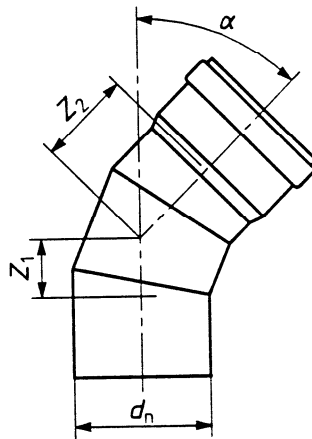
Bend with socket and spigot end, butt-fused from segments
